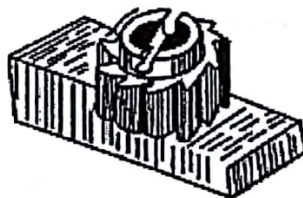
illustrates some types of milling cutters along with workpieces. Milling cutters are made in various forms to perform certain classes of work, and they may be classified as:
